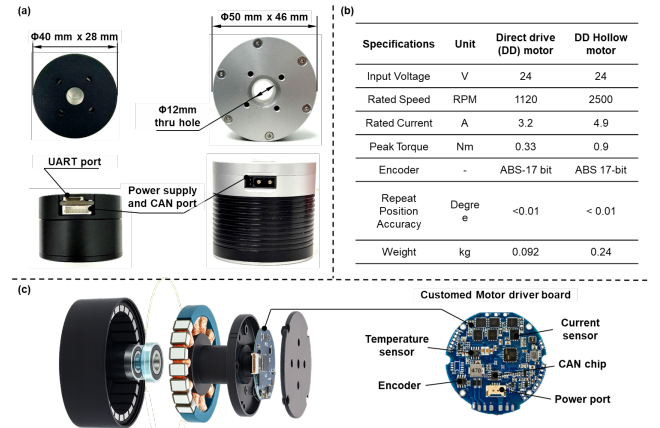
(a) dimensions, (b) specs sheet, and (c) exploded view of the two custom-made direct drive actuators.
